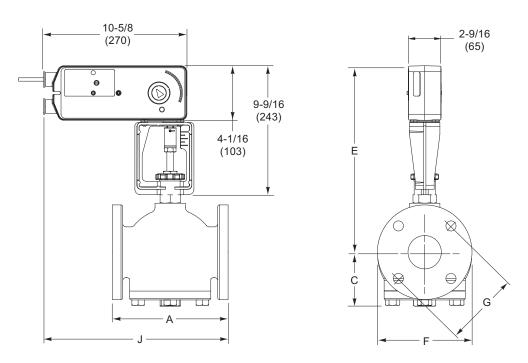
Mx61-720x with 2½" to 4" N.C. 2-Way VB-9313 Flanged Globe Valve.
